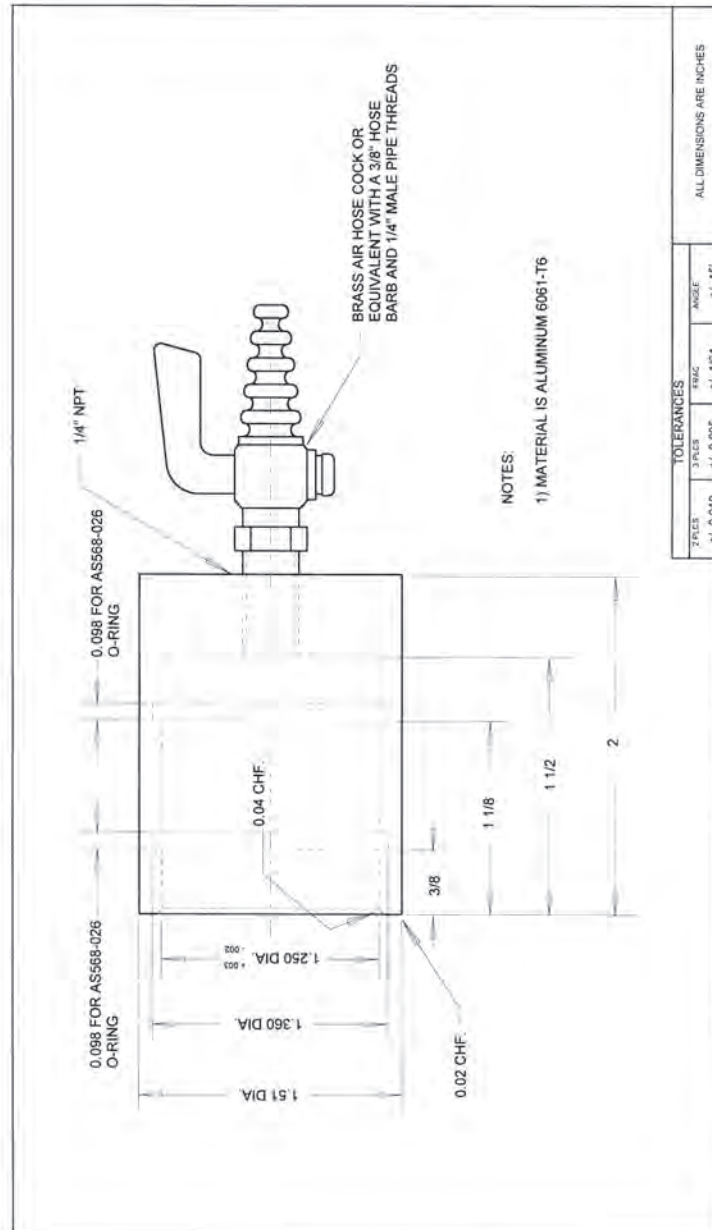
FILTER CASSETTE, LOWER SECTION
